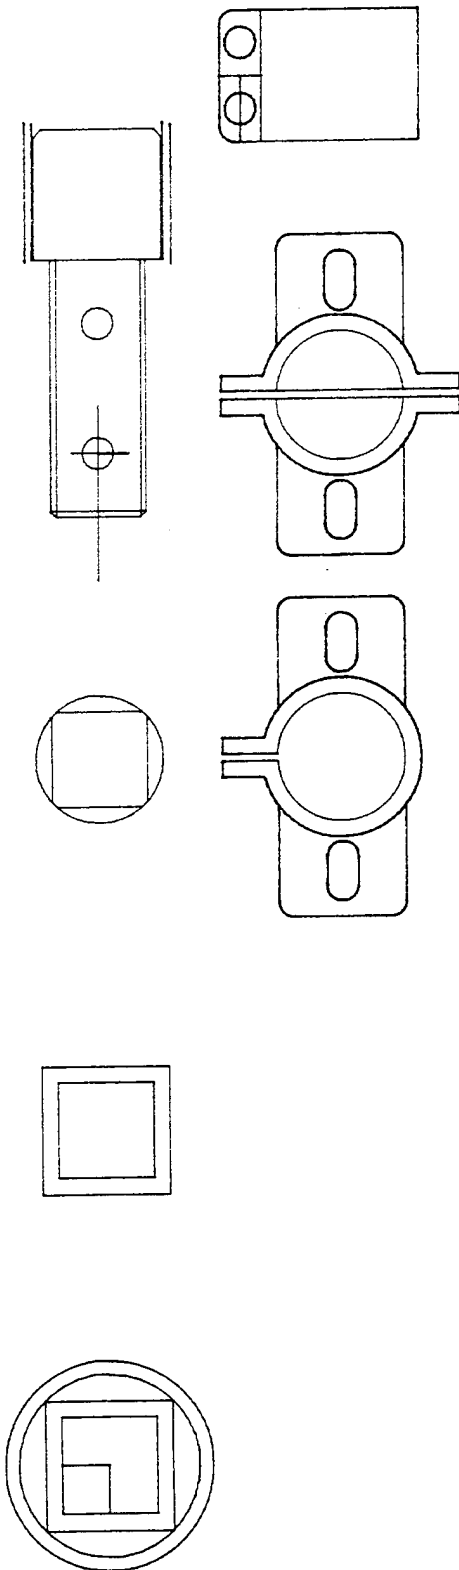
An engineering diagram of the coupling flanges used to connect the struts (shown in Figure 12). This type of flange will be used to position struts where the rotation angle of the suspended strut is important. Other, L-shaped flanges are being manufactured for more basic connections.
